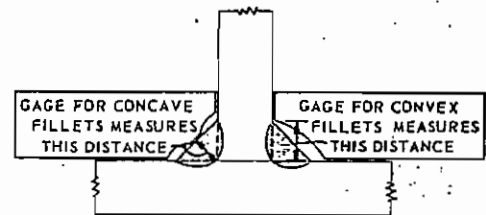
Convex fillets may be measured with gage of type shown on right; in this case it measures the leg size. Concave fillets are measured with gage like the one on left; in this case it measures the weld throat.
